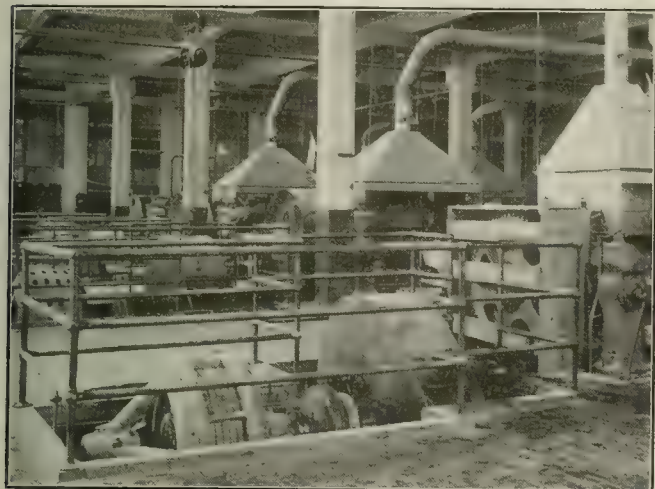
MOTOR SET IN PIT TO ALLOW CONNECTION WITH MACHINE DRIVEN
